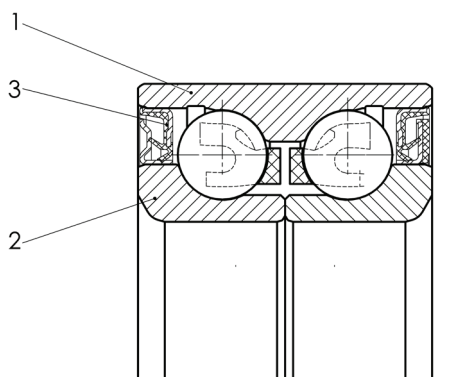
Generation I wheel hub unit with a double-row angular contact ball bearing; 1 outer ring, 2 inner ring, and 3 seal
